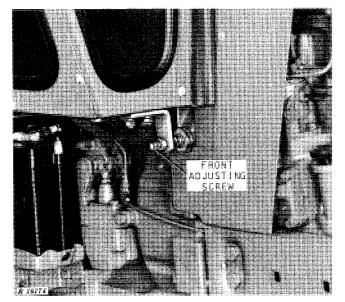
Front Adjusting Screw Remove cab assembly from tractor (Fig. 30).
